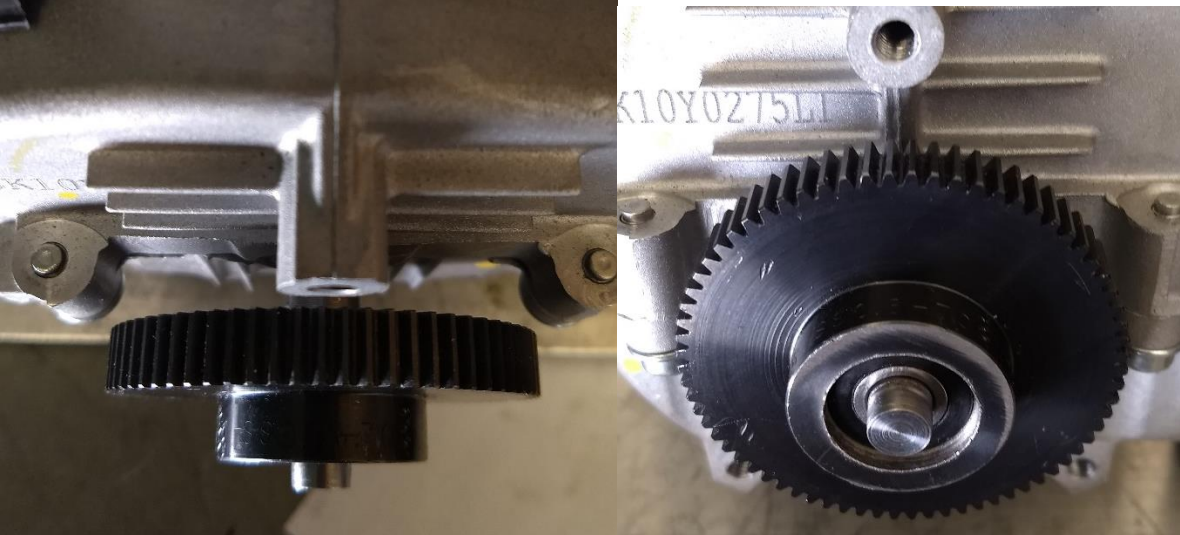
The finished gear and adaption shaft threaded onto the engine.
